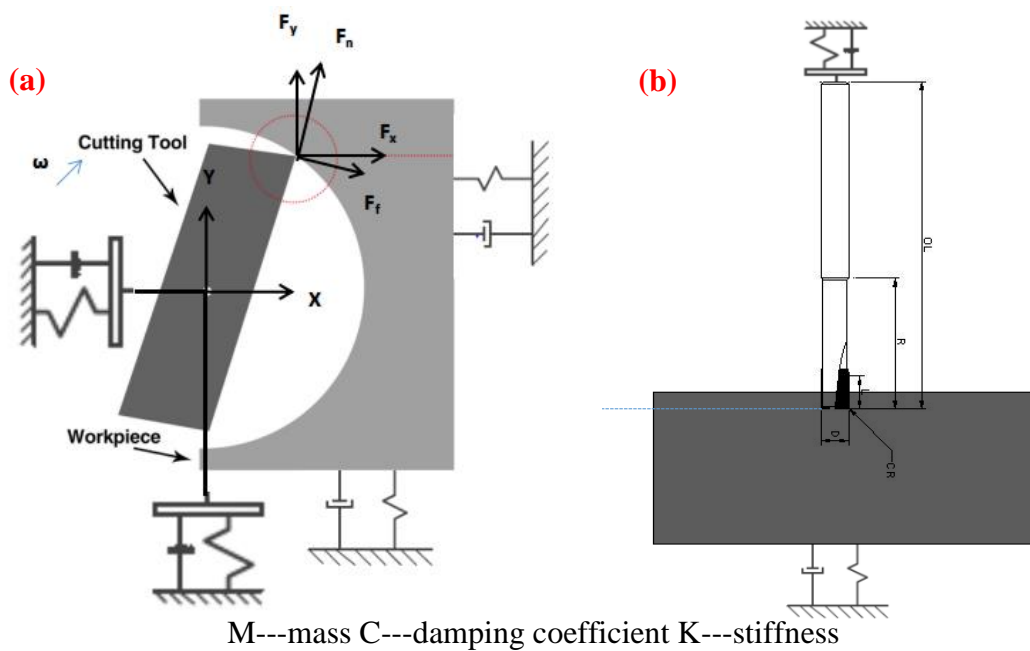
Tooling spring-damper system and workpiece spring-damper system (a) X direction and Y direction (b) Z direction
